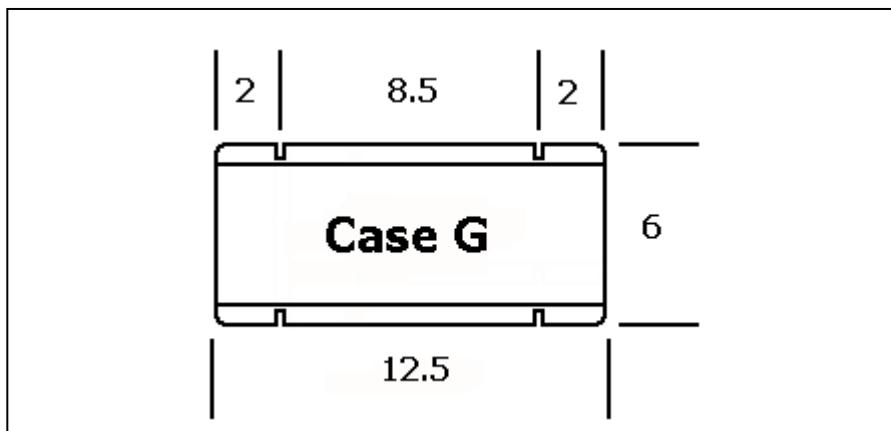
Inverter mounting footprints (dimensions are in inches)
